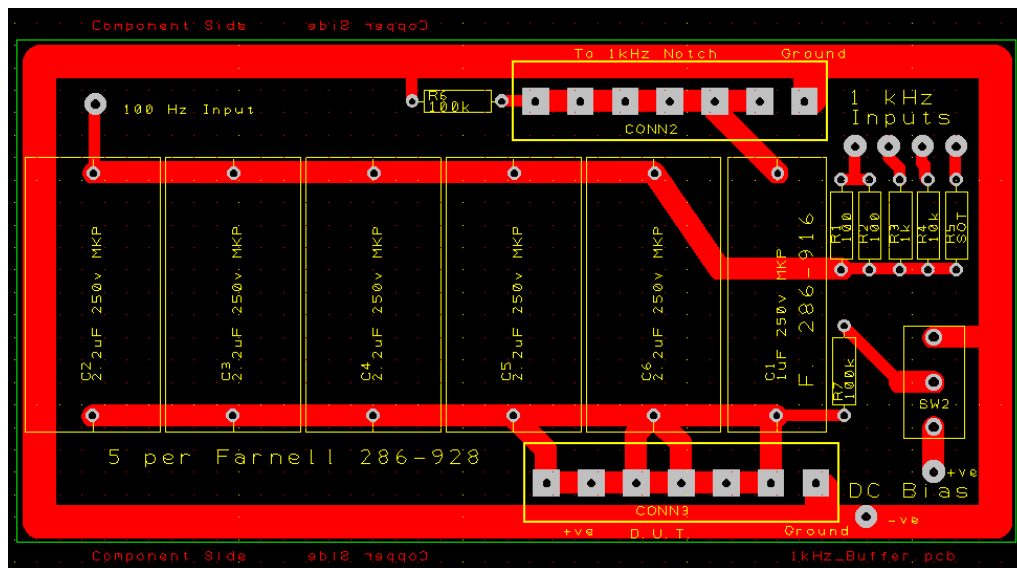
The 110 * 55 mm single sided PCB used to assemble Figure 3, the 1 kHz DC blocking buffer network.
